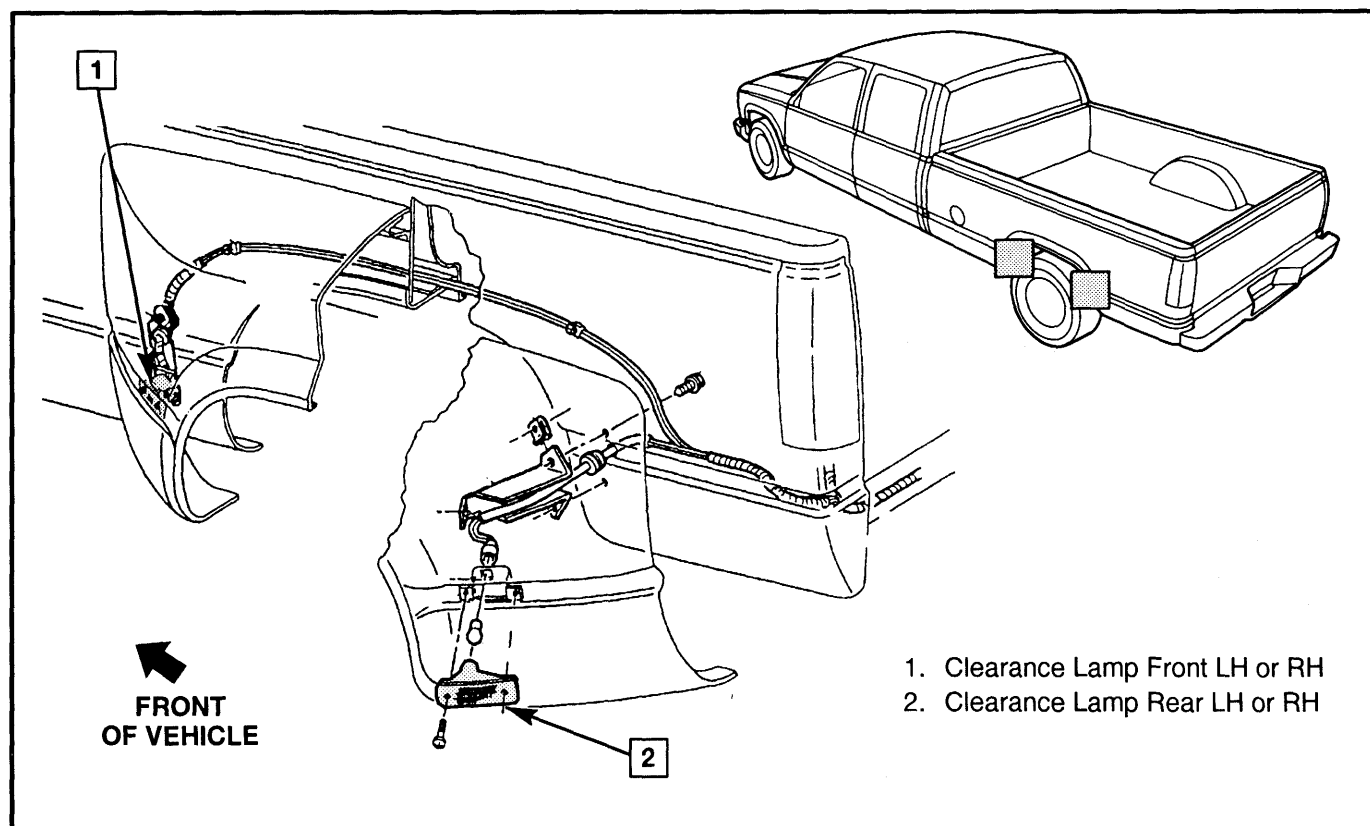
Rear Clearance Lamps W/Dual Rear Wheels
